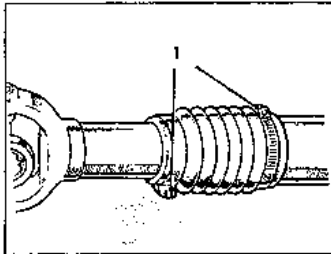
Refit the rubber boot to the shaft with worm drives (1) 180° apart (Sec 5)
